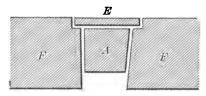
Car Casting, Movable Stool-Plug, Large Scale.
